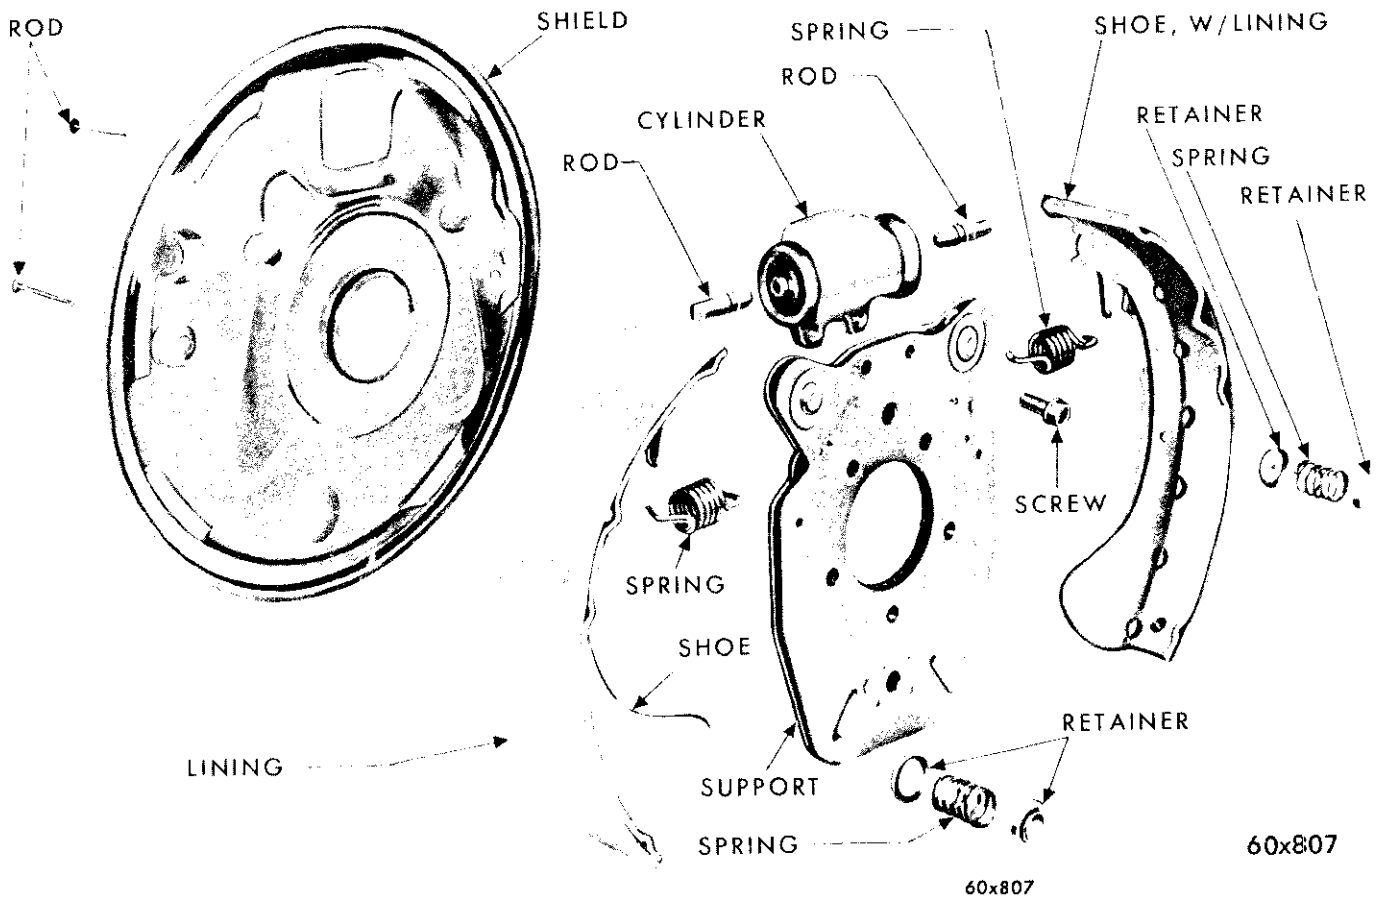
Total Contact Brakes (Rear) (Exploded View)
